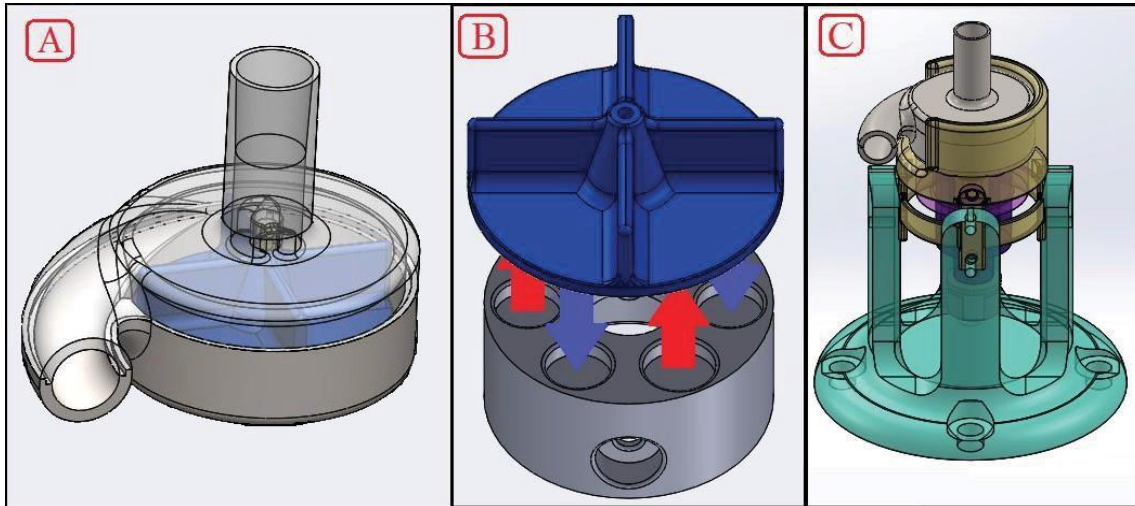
Components modeled in 3D CAD: A) The VAD under development at IFSP SPO; B) The drive by magnetic coupling between the HPB rotor and the VAD; and C) Assembly in 3D CAD of the mechanical components of HPB.
